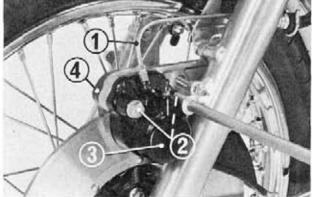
(i) Oil pipe (a) Caliper A (2) Caliper setting (4) Caliper B
